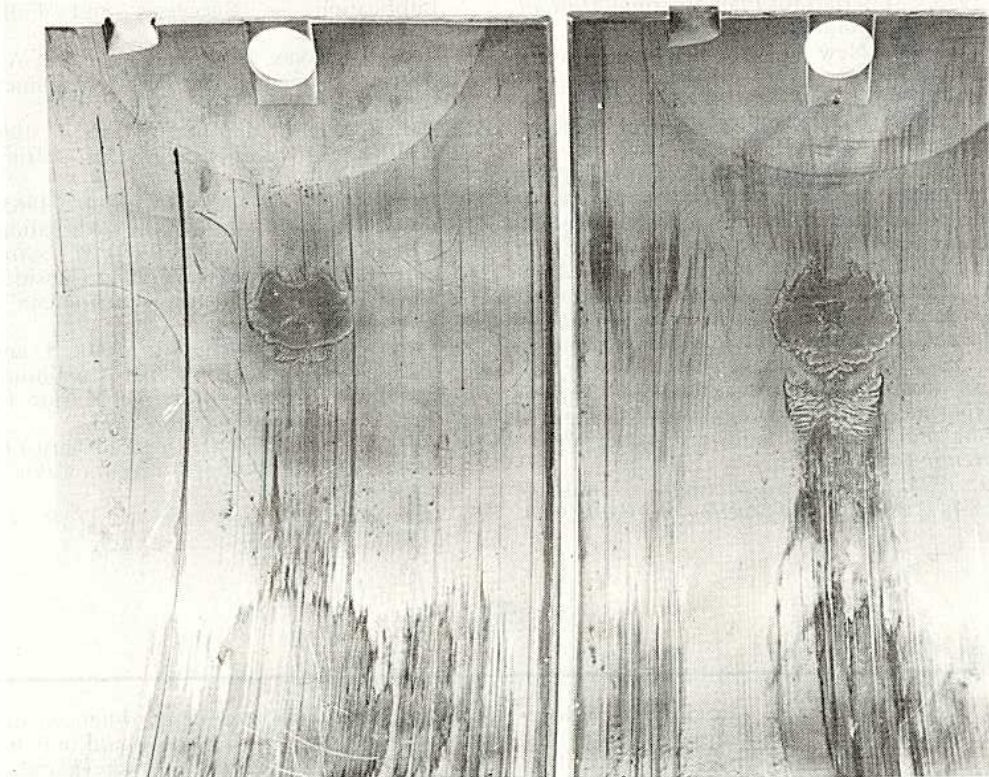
Cavitation erosion of copper-lead overlay plated main bearings from crankshaft oil hole
